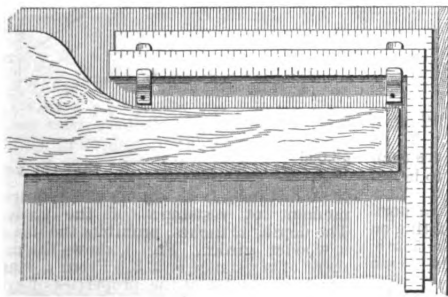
Showing Manner of Disposing the Steel Squares, the Front of the Saw Till Being Cut Away to Give Room for the Blades.
